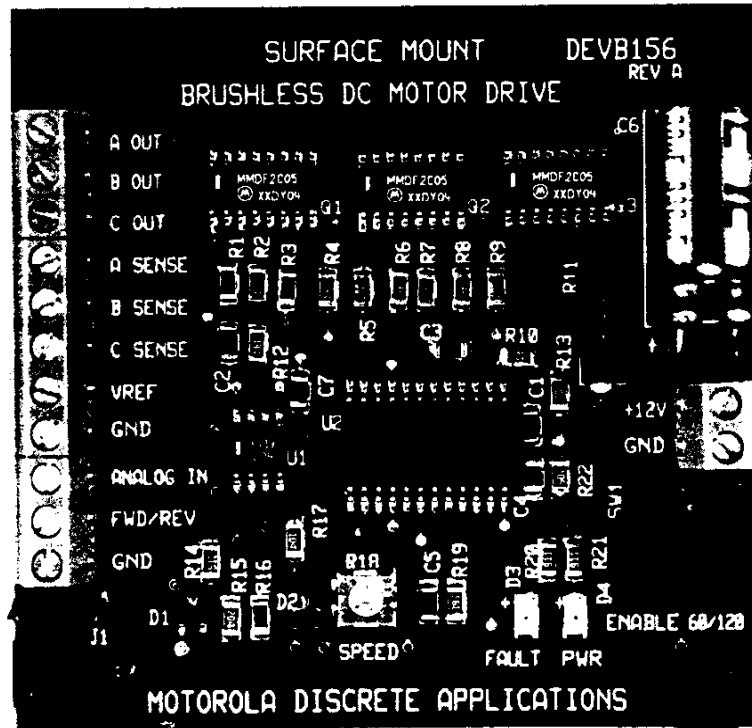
DEVB156 Surface Mount Brushless DC Motor Drive EVB
